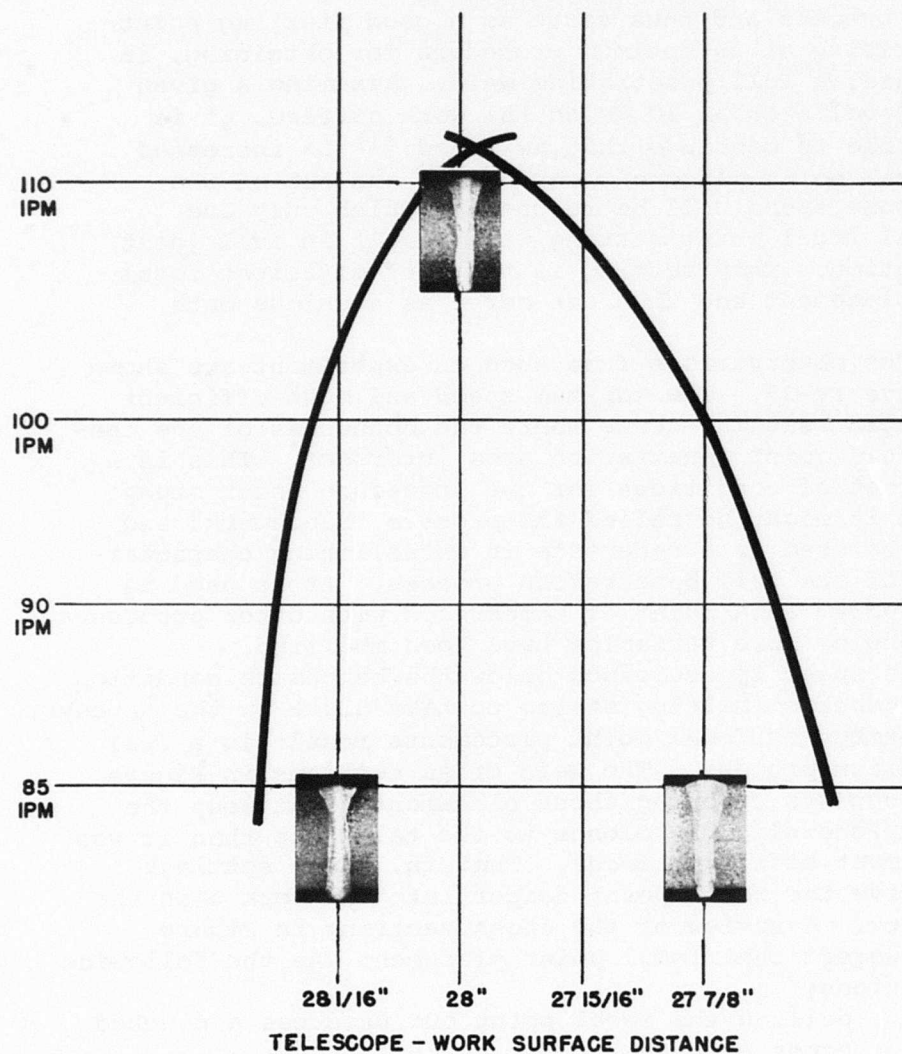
WELD CROSS SECTION RELATED TO
